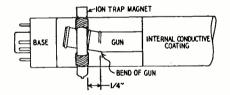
The correct starting position for the trap magnet when adjusting it is about ¼ inch behind the gun's bend.
